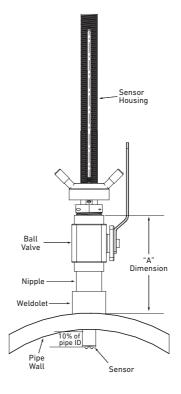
Hot-Tap installation with "A" dimension using a ball valve, short nipple and weldolet (threadolet)
